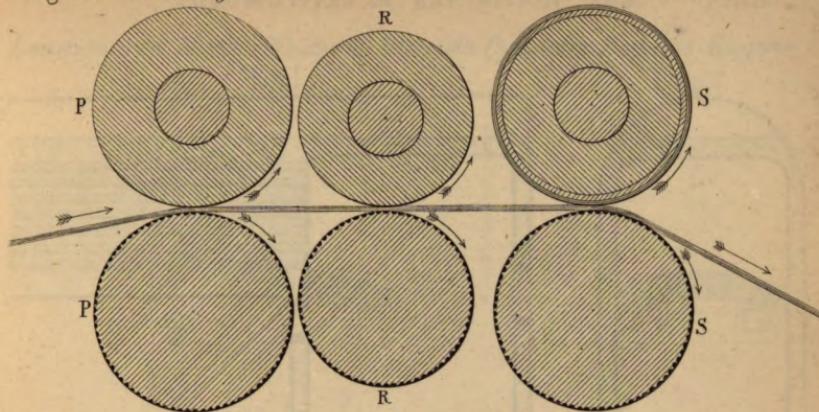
Drawing Rollers for Long fibred cotton. Full size.
